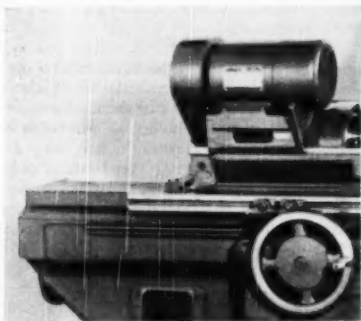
LET A MOTOR LOOK LIKE A MOTOR AS IT DOES ON THIS GRINDING-MACHINE HEADSTOCK
